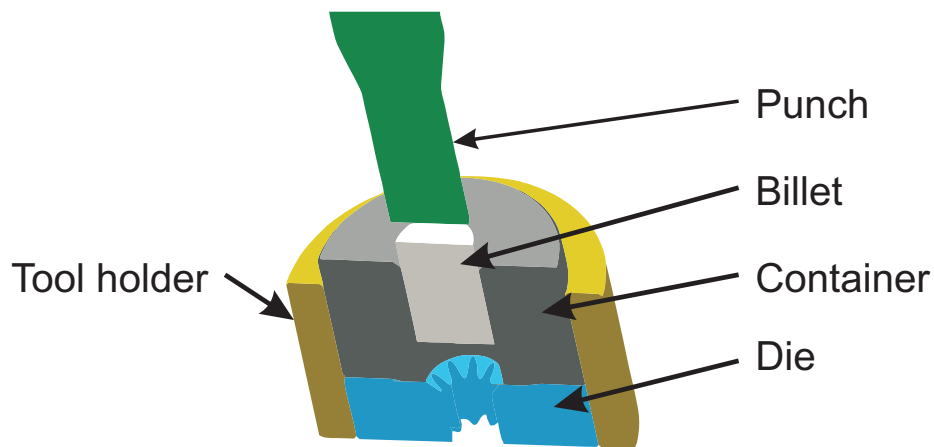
CAD model of the extrusion tool elements. General tolerances are $\pm 50 \mu\text{m}$.
